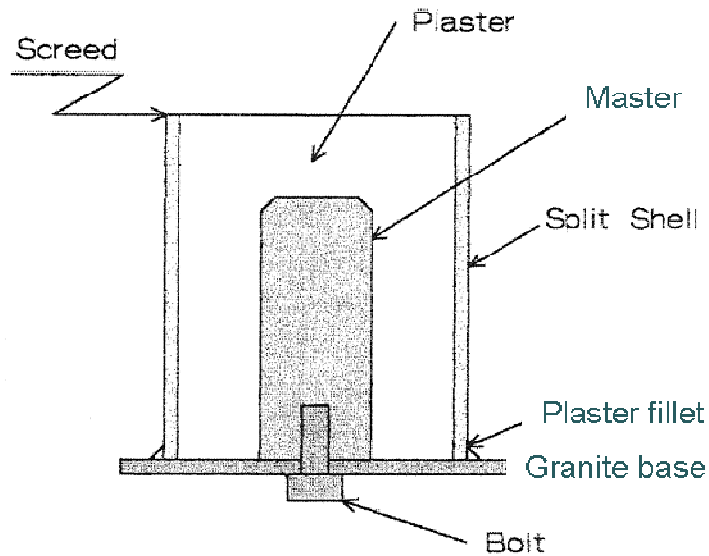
Mould former (cross-section) used for the making of plaster moulds
